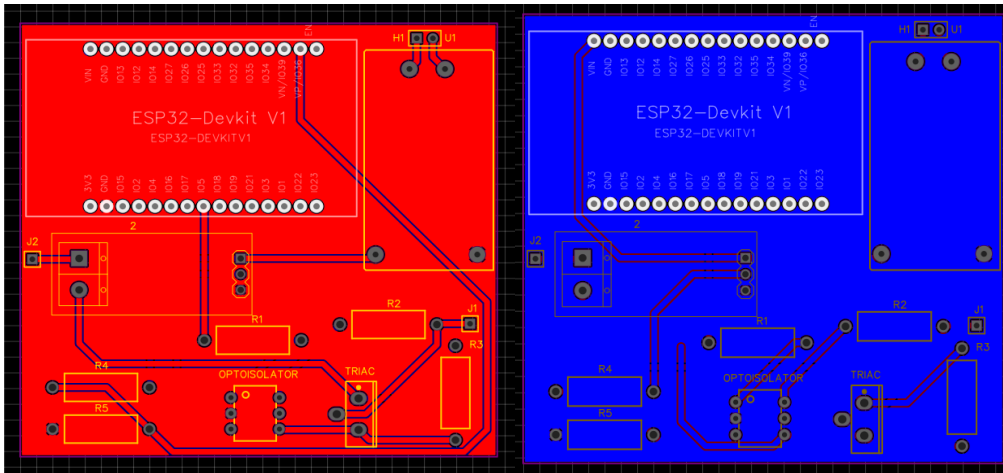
Two Layers PCB Layout of Smart Wall Outlet
